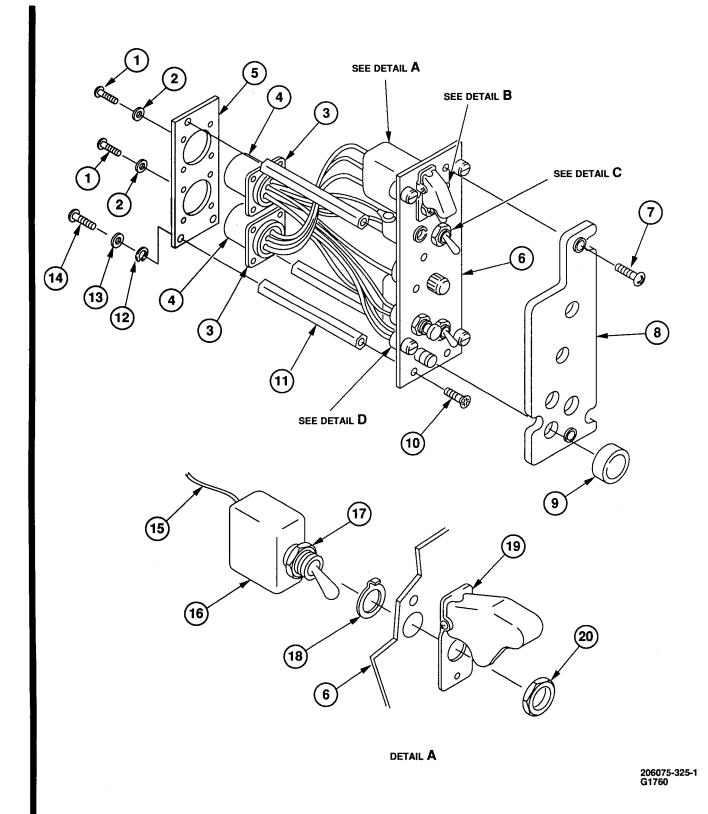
Disassembly – ATAS Control Panel (Sheet 1 of 2)
